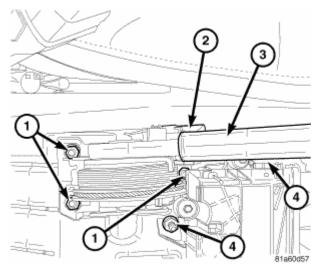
Identifying Parking Brake Lever Assembly Mounting Nuts, Parking Brake Lamp Switch Wire,
